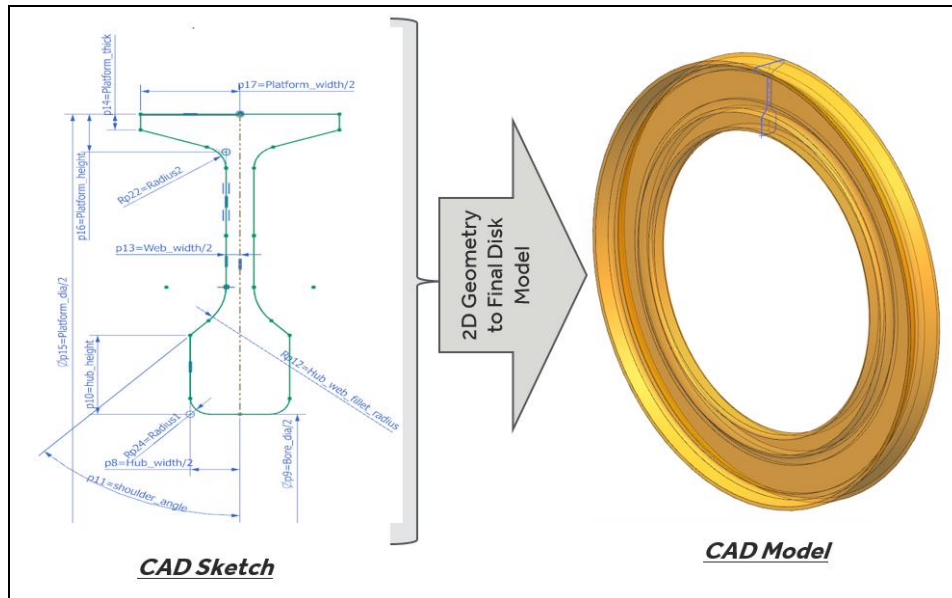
Derived CAD (NX) Geometry from imported tool Design Geometric Dimensions
